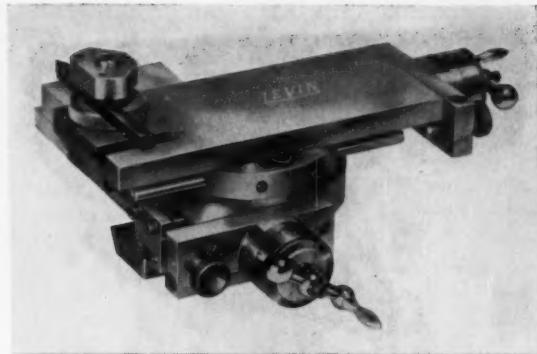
Slide-rest for jeweler's lathe, equipped with screw feeds
